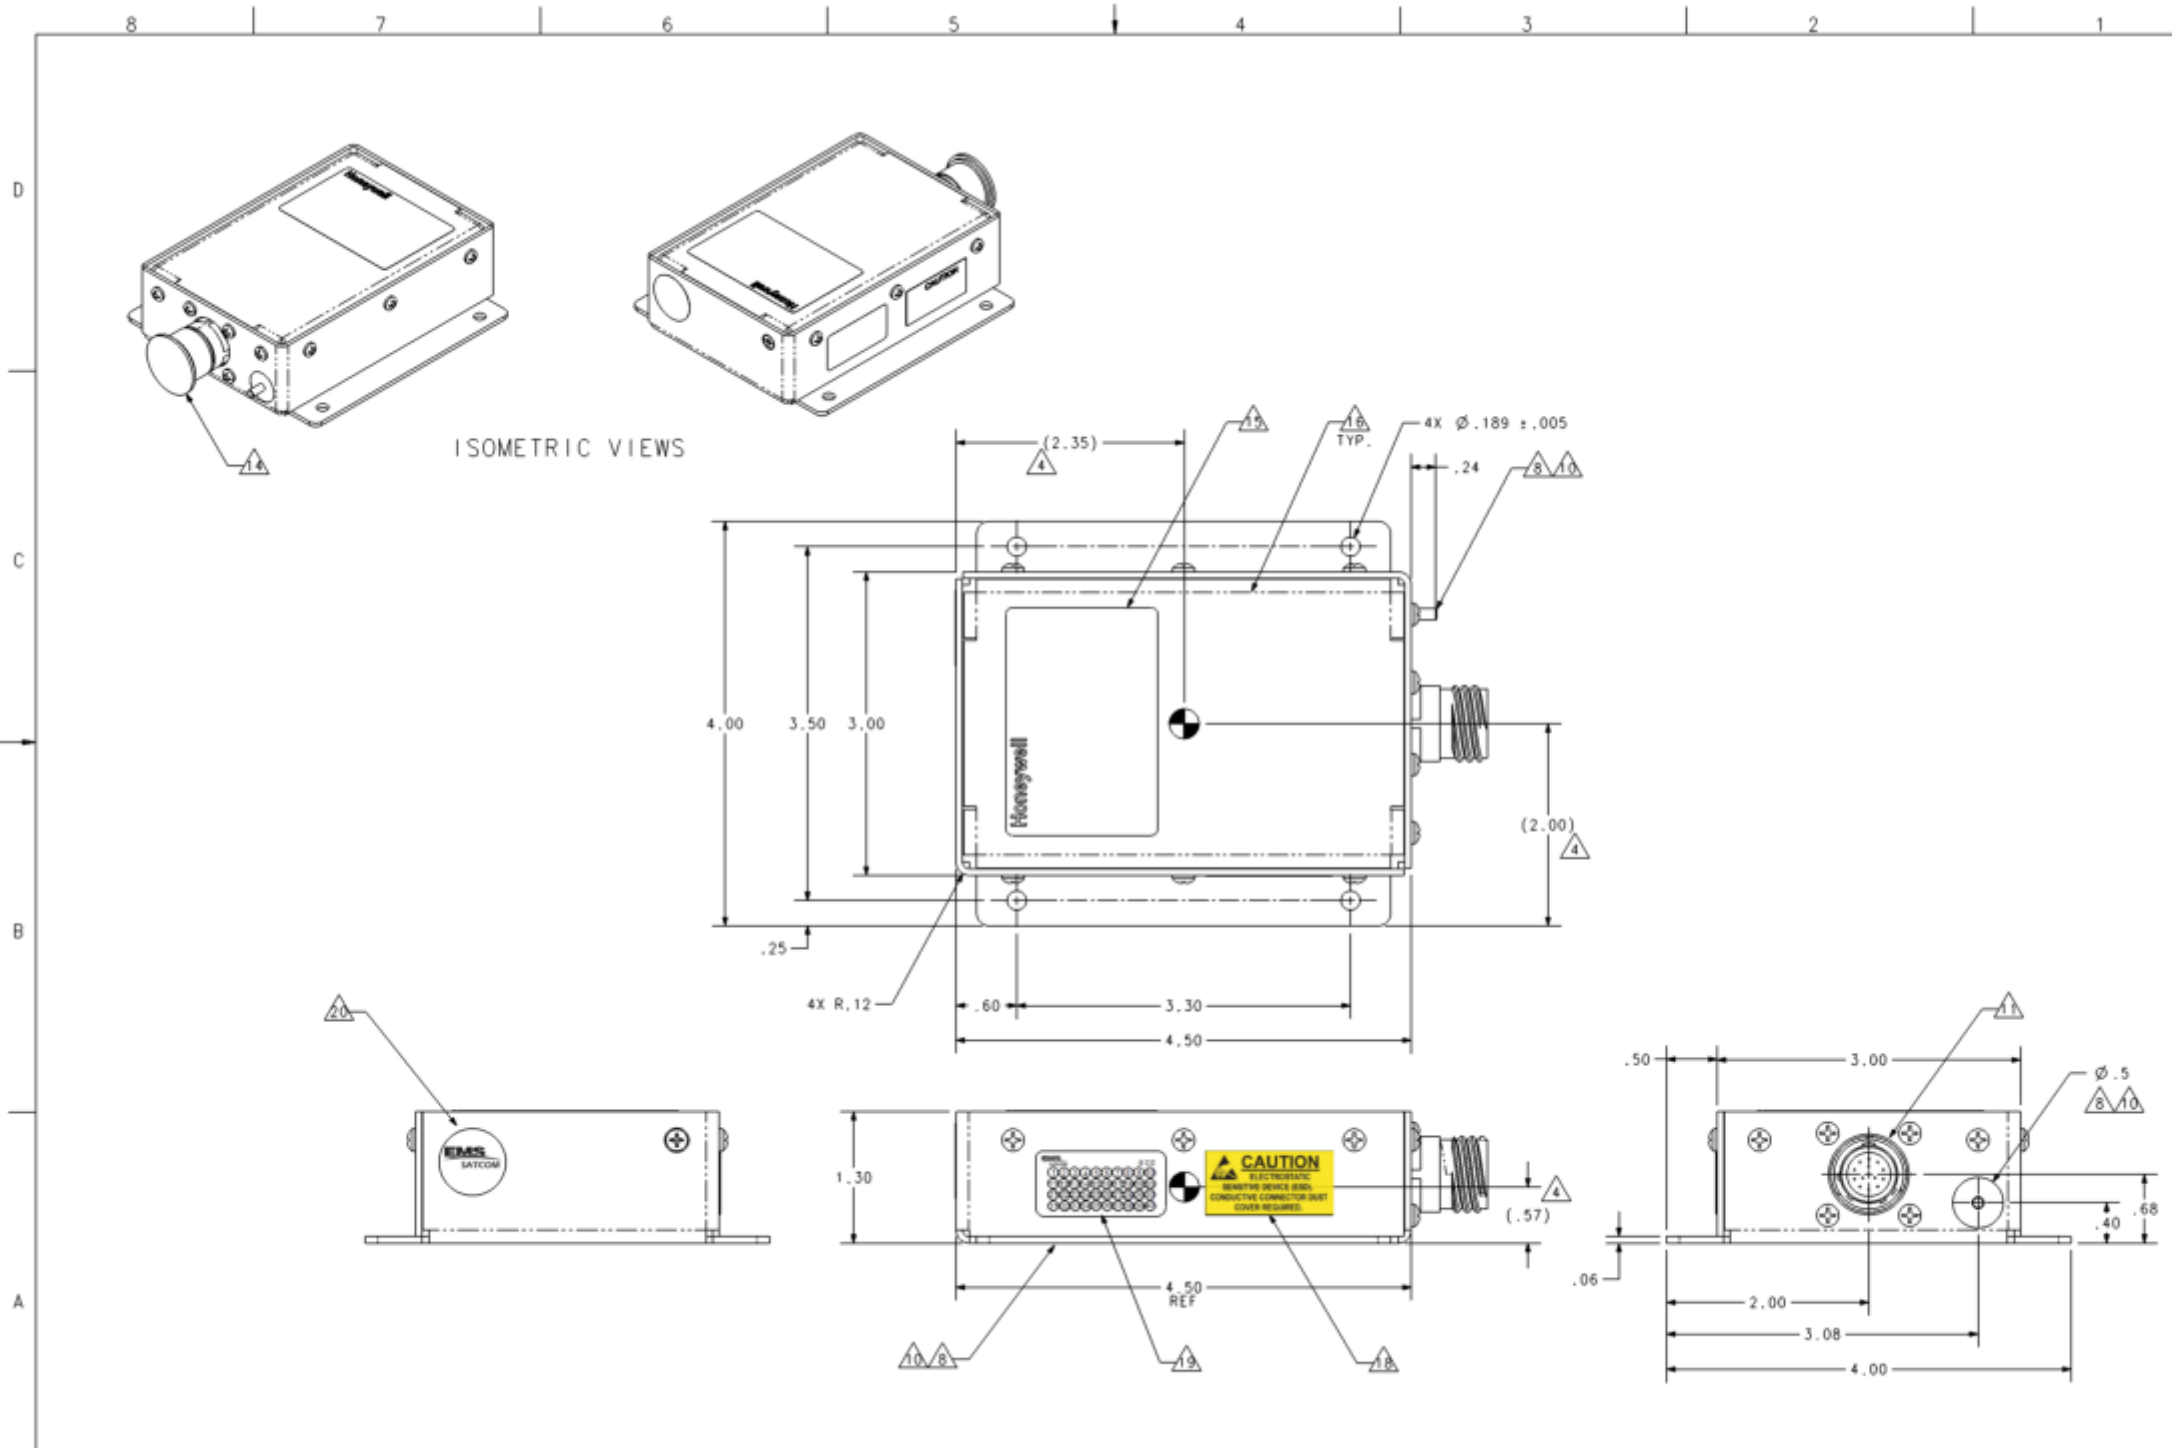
(Sheet 1 of 2) APM Outline and Installation Drawing (90401121)
